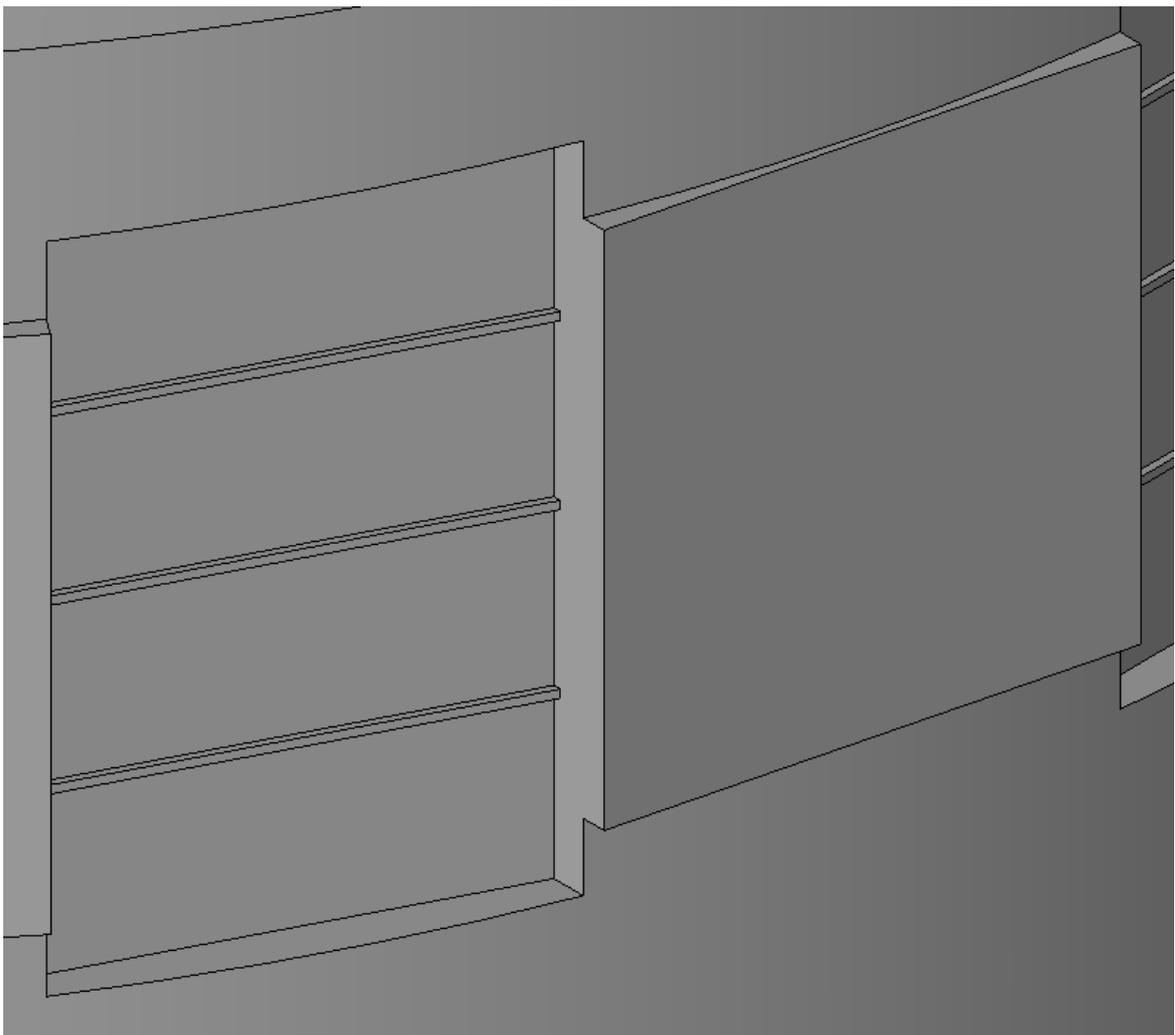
Details of the finished cooler placement surface on cylindrical faces of the stator frame.
